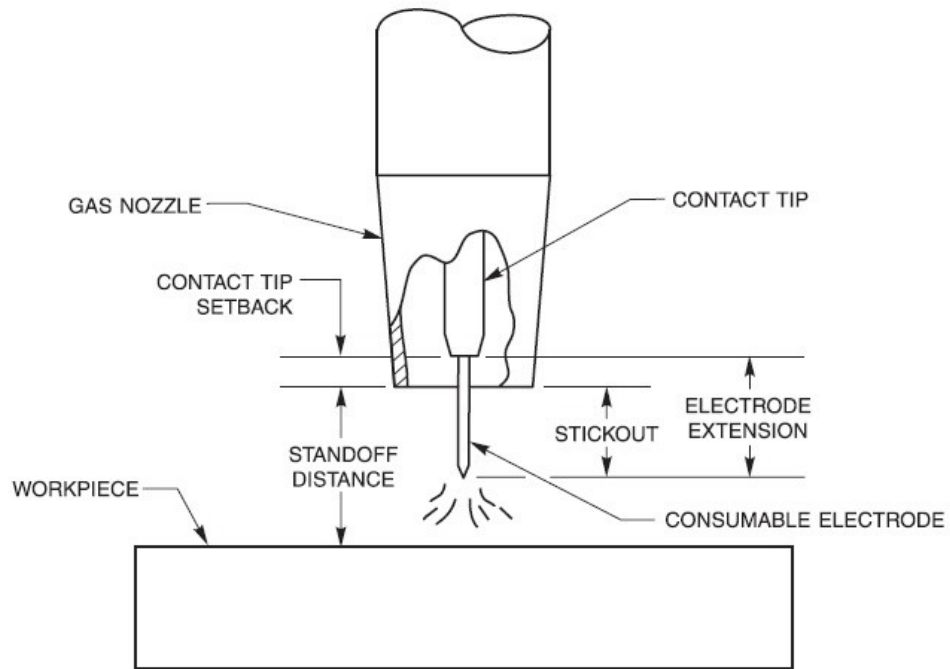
MIG/MAG fusion welding process. [7]
